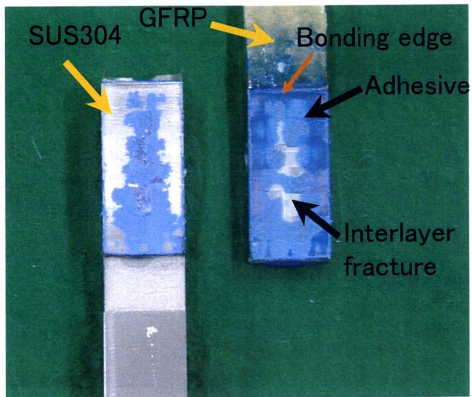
Fracture surface of adhesive joints degraded at 50 °C and 85 % for 1298 hours.
